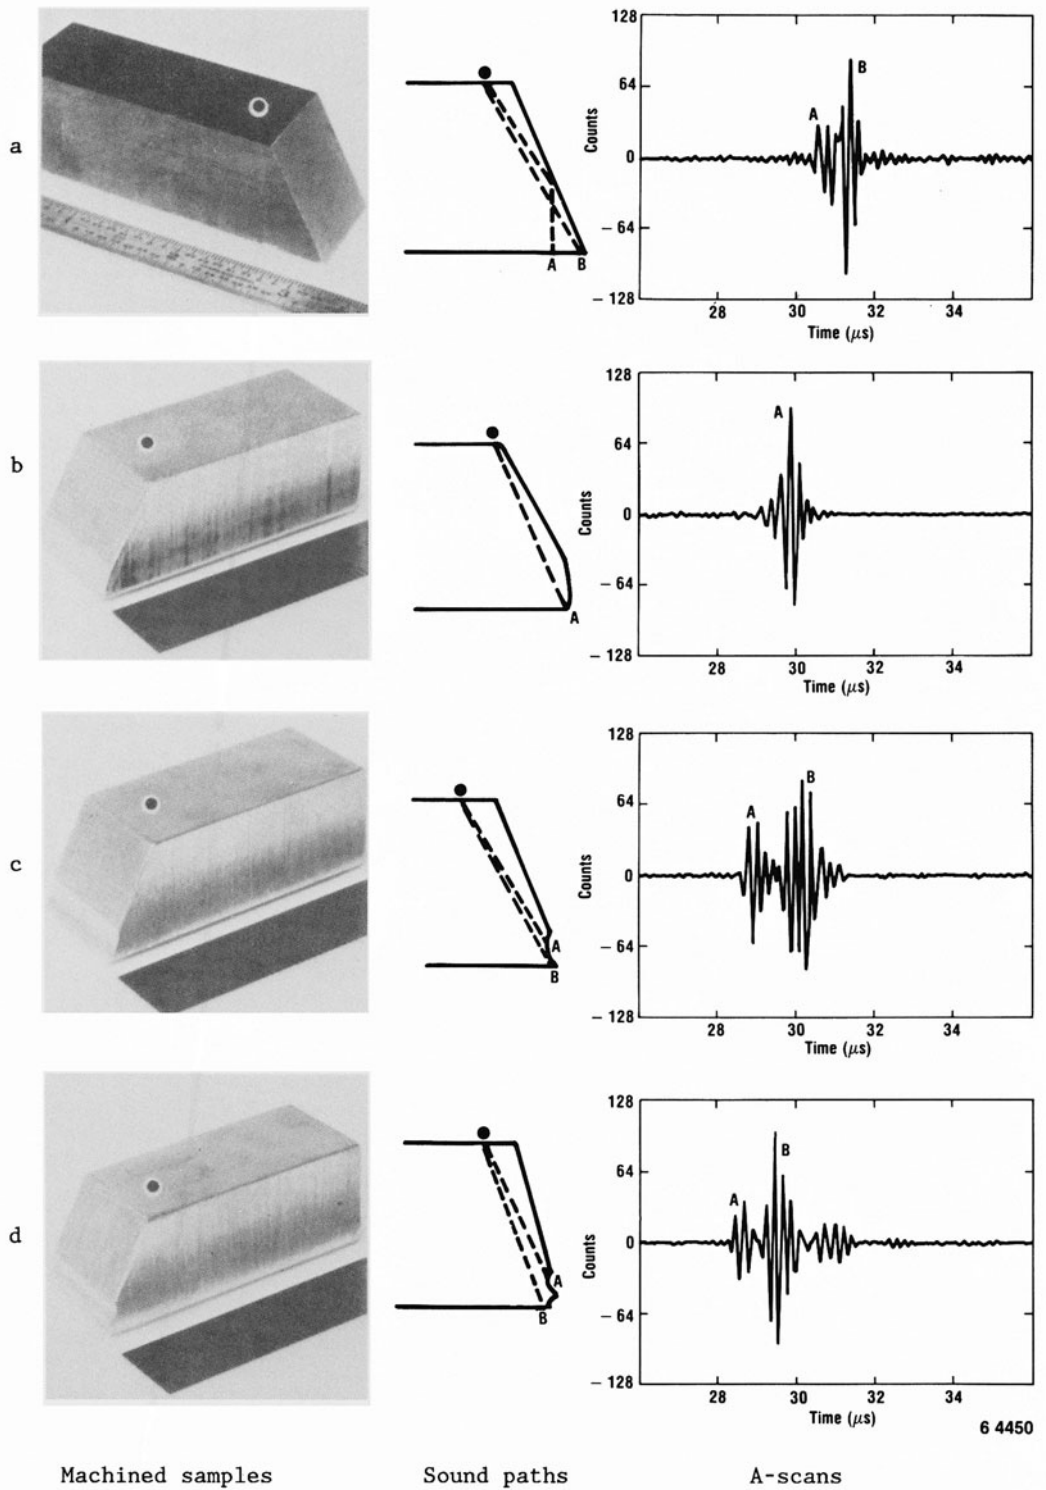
Machined samples that simulate the solid/liquid interface geometries of a penetrating weld pool and ultrasonic reflections from the interfaces.
